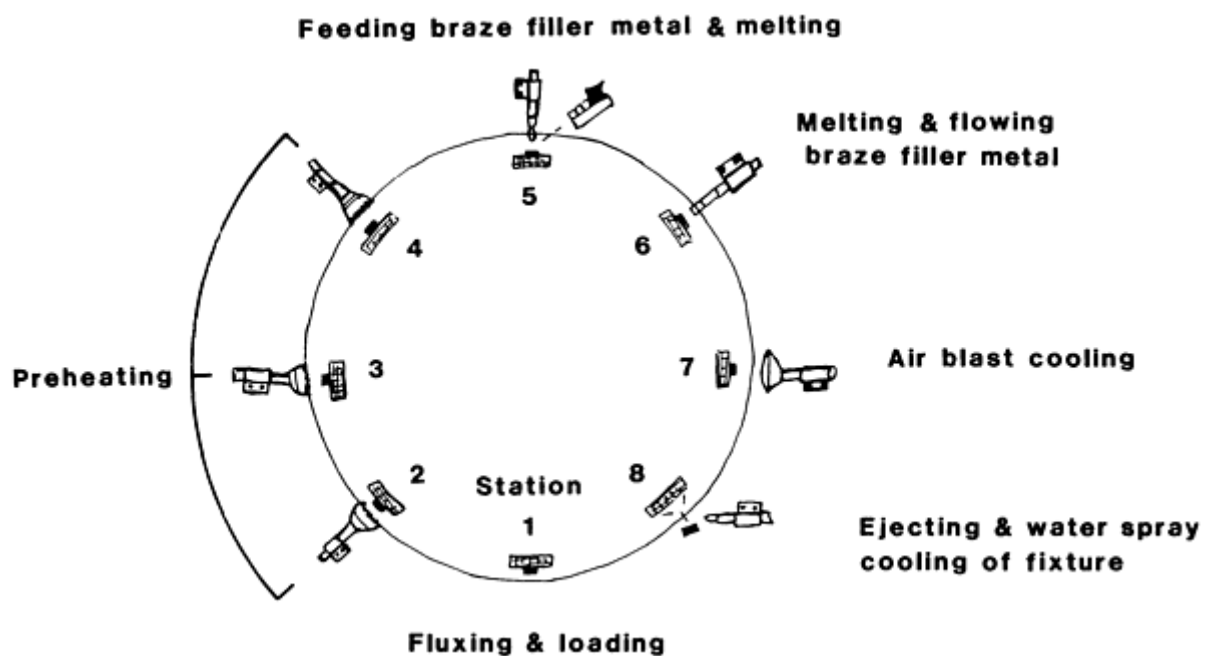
SCHEMATIC OF AN EIGHT-STATION AUTOMATIC TORCH BRAZING OPERATION THAT PRODUCES MAGNET ARMATURE ASSEMBLIES (230 PIECES/H) USED AS STRIKING MEMBERS OF A PRINTING MACHINE
